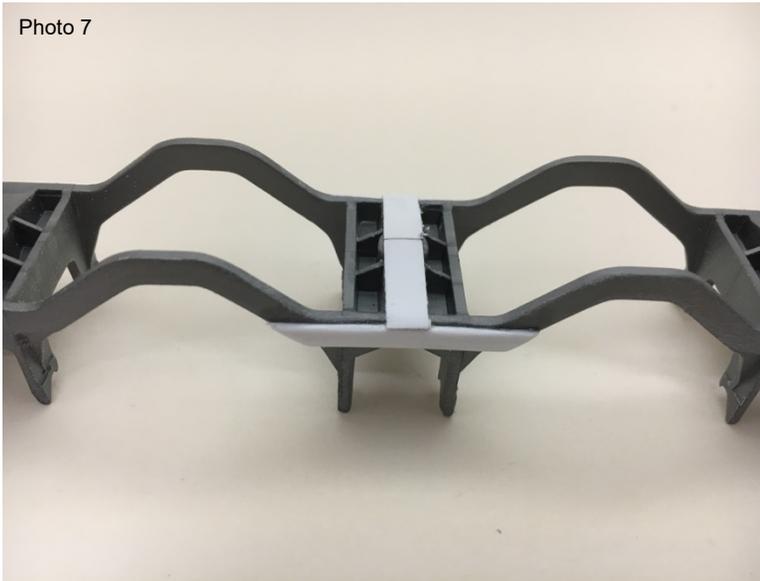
The car is then flipped over and scrap pieces of styrene is used to brace the seam on the bottom of the car.
